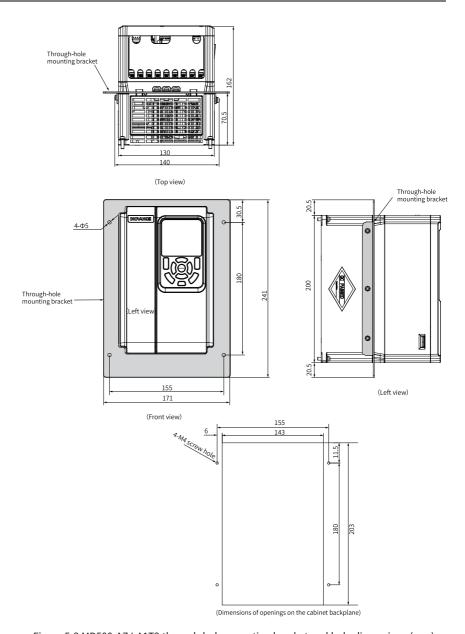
MD500-AZJ-A1T2 through-hole mounting bracket and hole dimensions (mm)
